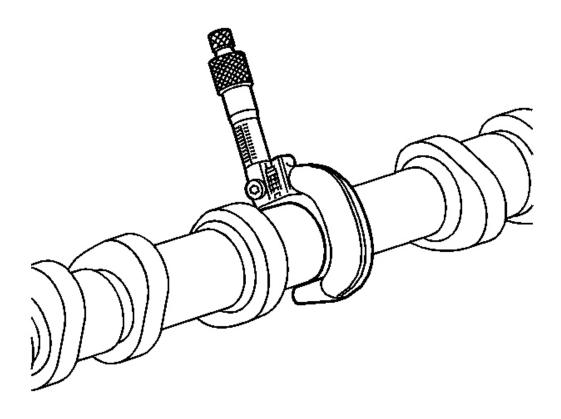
Measuring Camshaft Lobes Courtesy of GENERAL MOTORS CORP.
